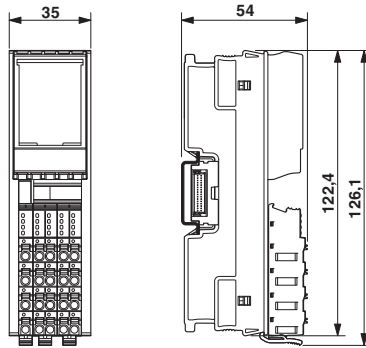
Nominal dimensions of the H housing with one terminal field (type 1H, e.g., AXL F DI16/1 HS 1H, AXL F UTH4 1H, AXL F RS UNI 1H)
